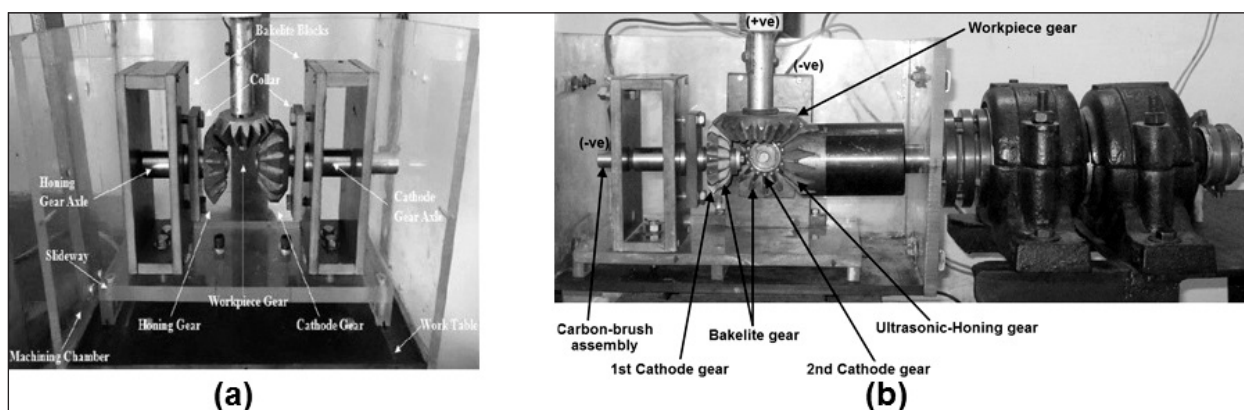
Arrangement of Workpiece, Cathode, and Honing Gears for Bevel Gear Finishing using (a) ECH/PECH [7], (b) UVECH in the Present Work
